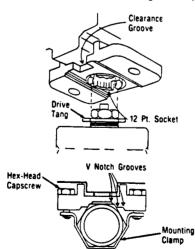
PNEUMATIC ACTUATOR REASSEMBLY.
